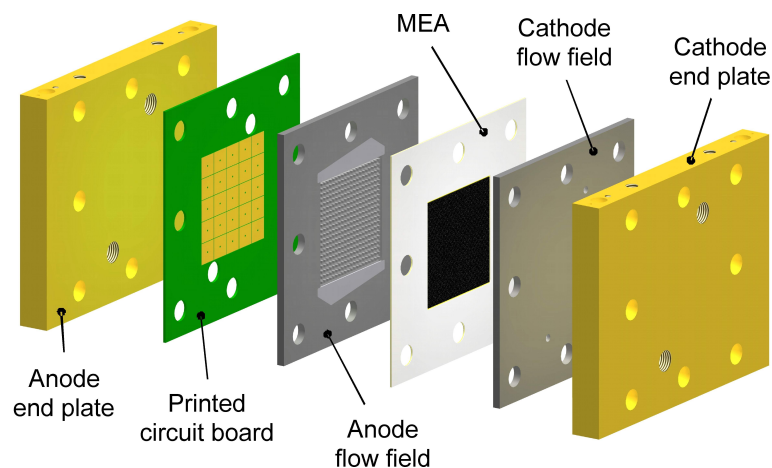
Exploded assembly drawing of the test cell including the adapter printed circuit board (PCB) used in [1, 2].
